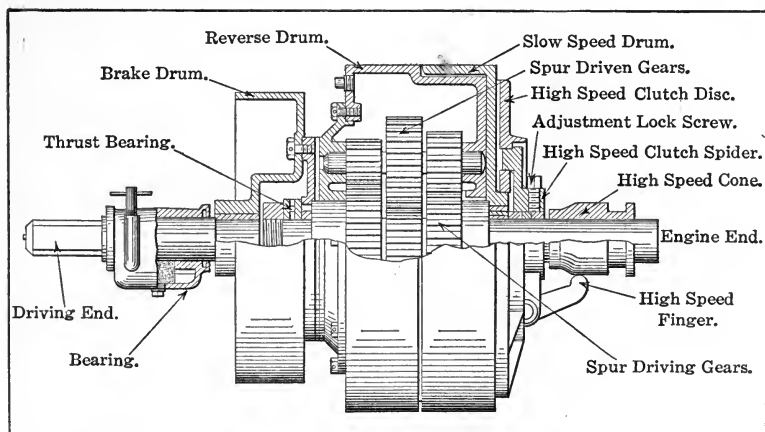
Planetary Gearing Utilizing Only Spur Gears Carried in Oil-Tight Case.
